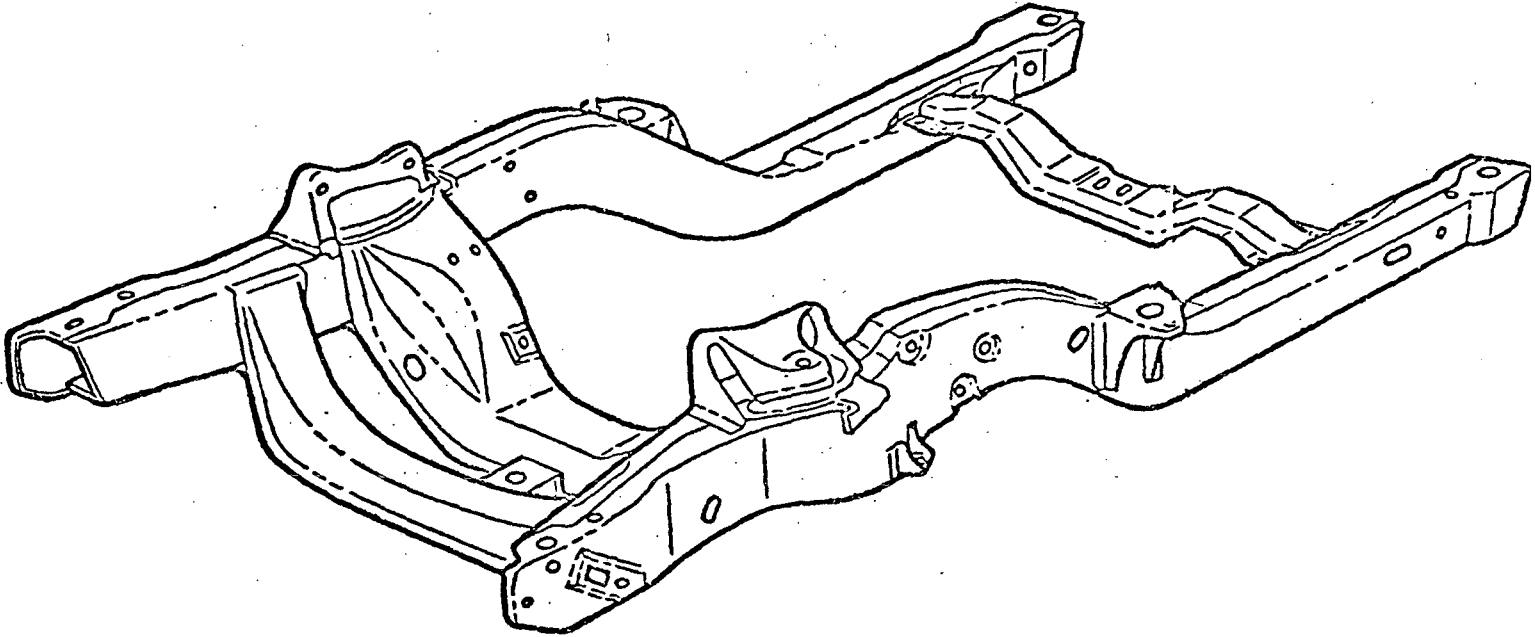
shows the Chevy II frame. The frame consists of 22 parts which can be summarized as inner and outer side members both left and right, front and rear cross members, engine and front suspension supports and various smaller brackets and supports.
